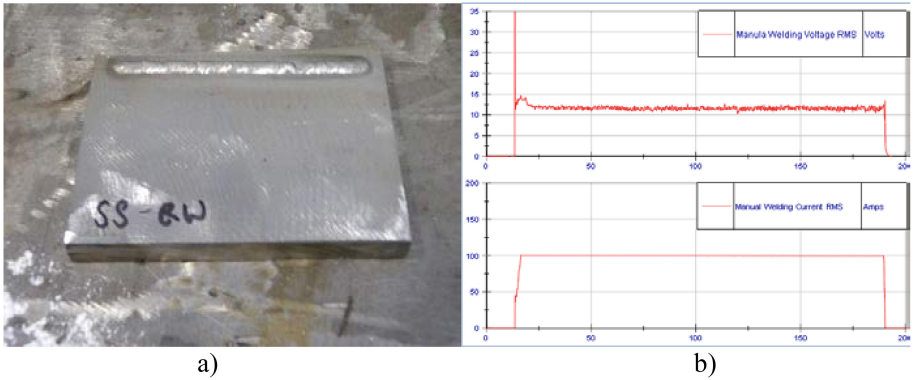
(a) Manual TIG welding on a SS plate at the Nuclear AMRC, (b) Electric measurements of the arc welding from an experienced welding engineer
